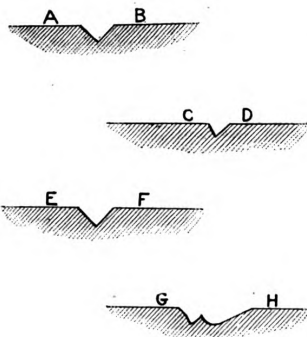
Enlarged Sections of Design Shown in Fig. 29.
